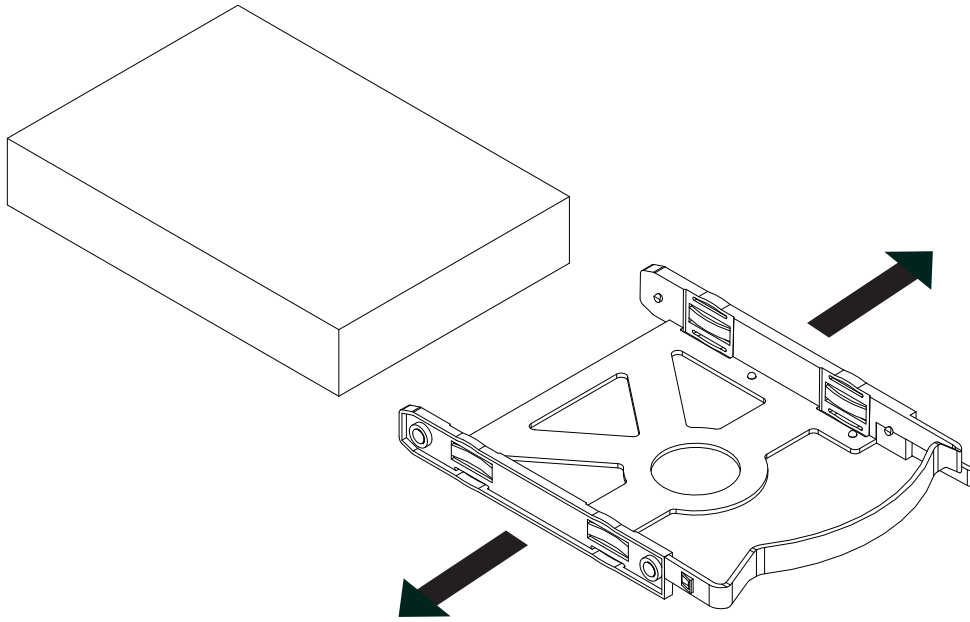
Removing 3.5" and 2.5" Hard Drives from a Drive Carrier
